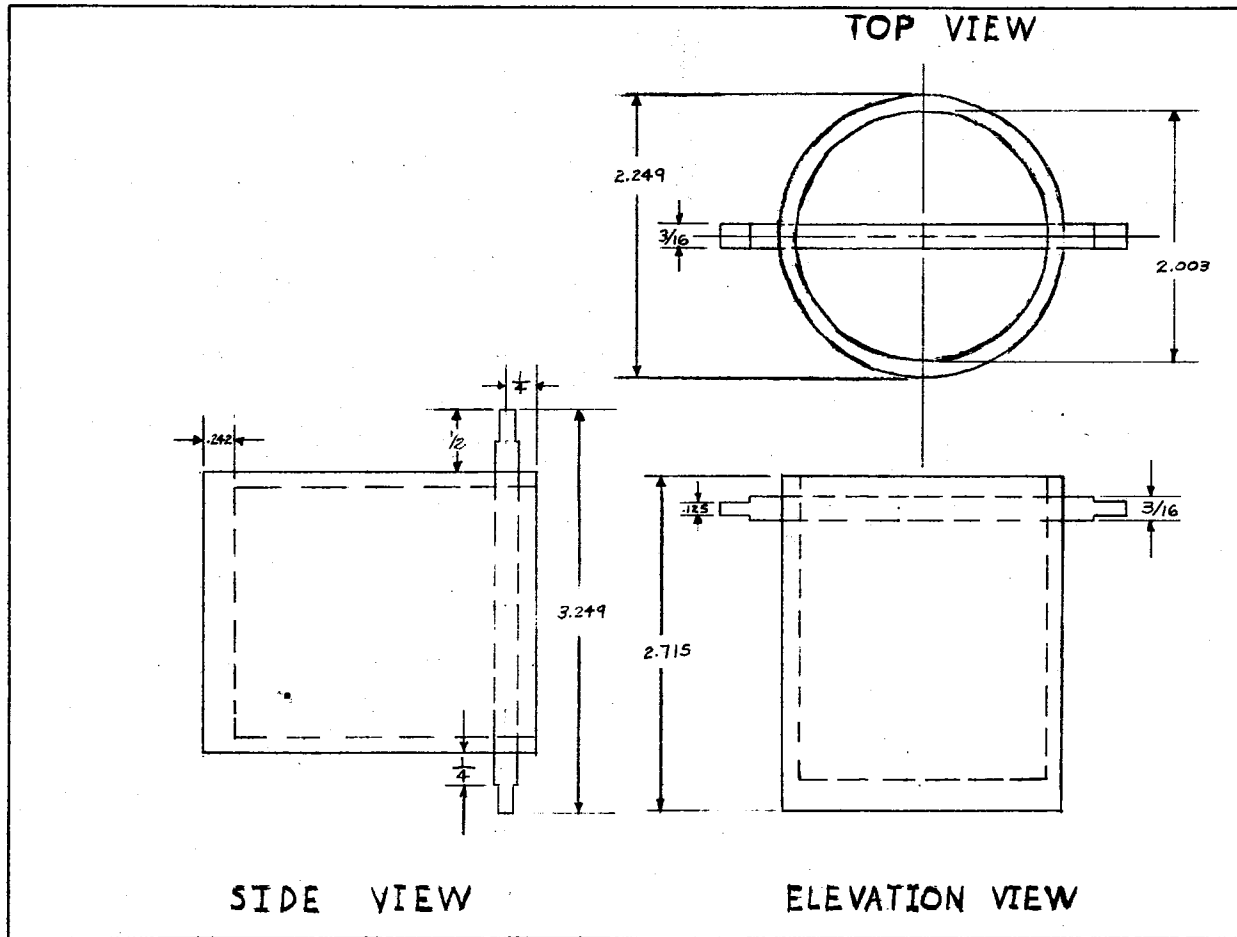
Detailed Dimensioned Drawing of the 100 ml Evaporative Dosimeter Cup
